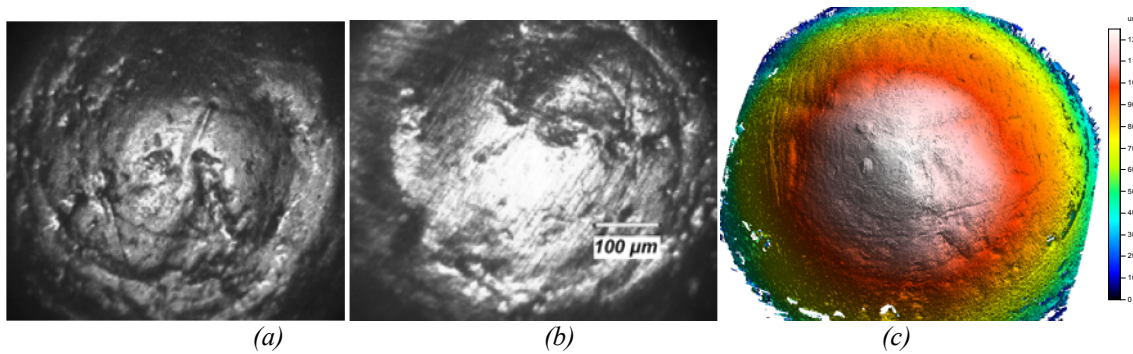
Micrographs for TD coated DRM 3 die sample (Sample # 11-1) contact surface (a) before test, (b) after test, (c) 3-d view of contact surface after the test using confocal microscopy
